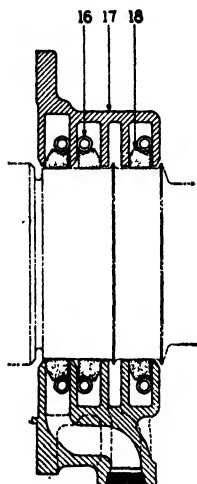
Carbon-type shaft gland packing. (General Electric Company.)
